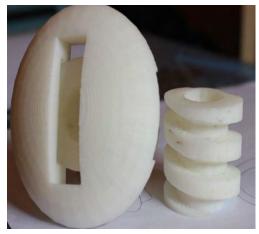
Urinal Cover Prototype Using FDM Machine
